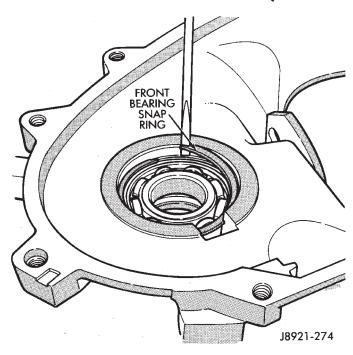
Front Output Shaft Front Bearing Snap-Ring Removal
